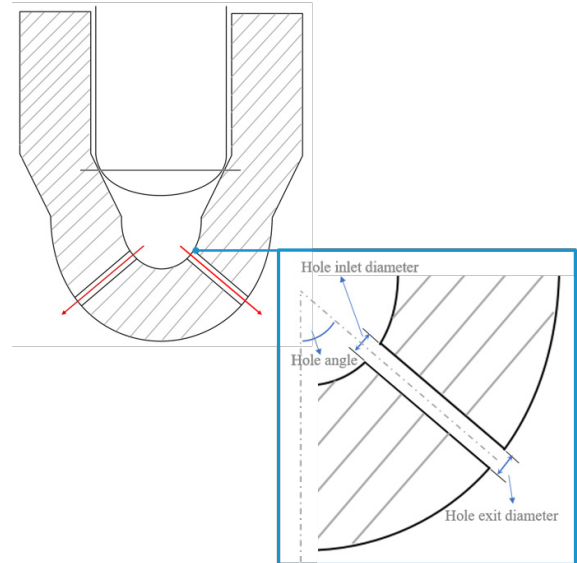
Cross section of a fuel injector and measured injection hole geometry.
